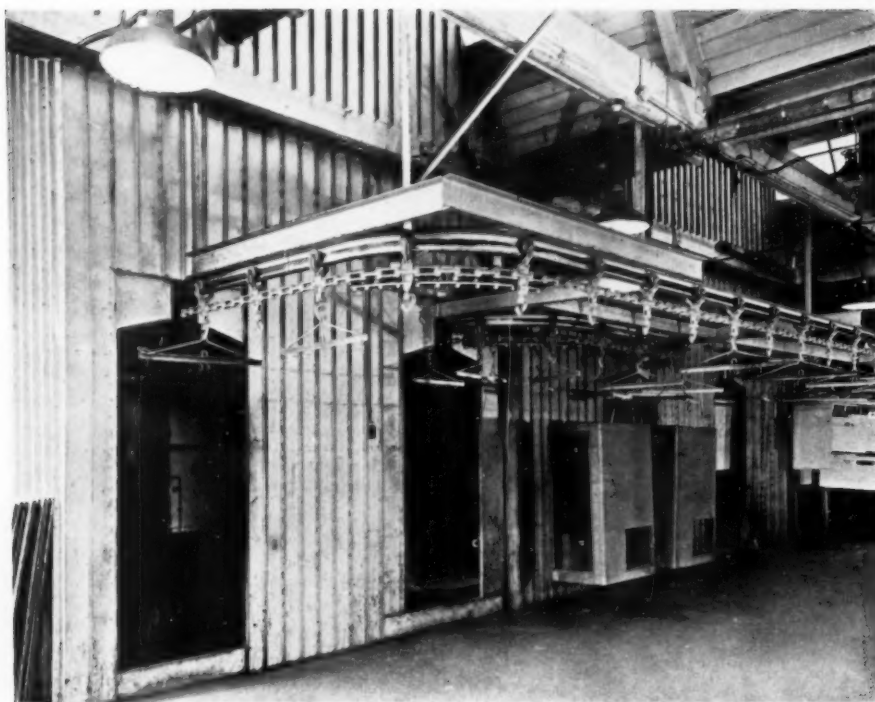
View outside of spray booth and oven enclosure, showing pieces suspended from overhead trolley conveyor ready to enter spray booths. (Courtesy Binks Manufacturing Company).
